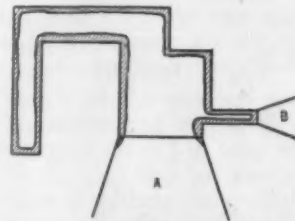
CROSS-SECTION OF CASTING WITH TWO GATING POSITIONS.
